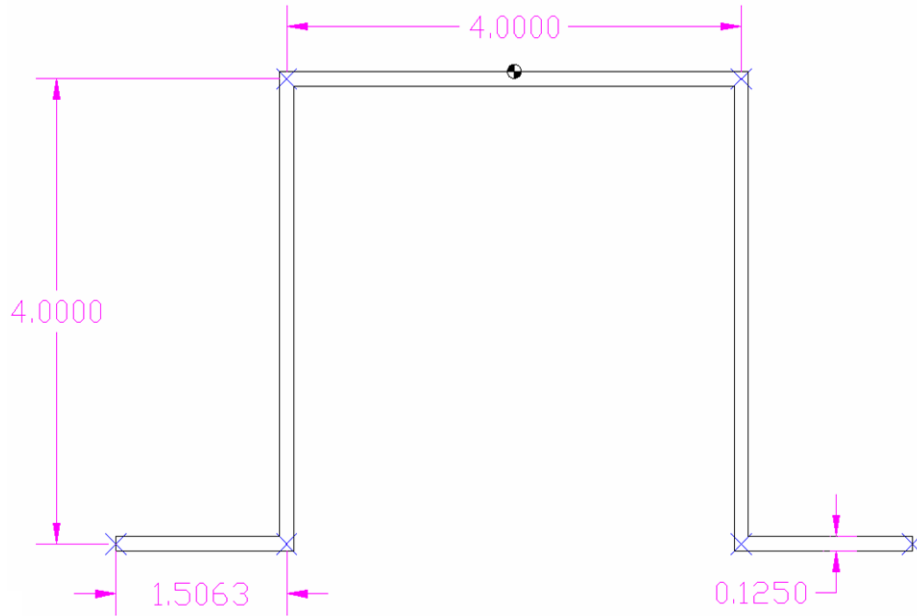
Cross Section View of Cross Bearer, Beam Model
